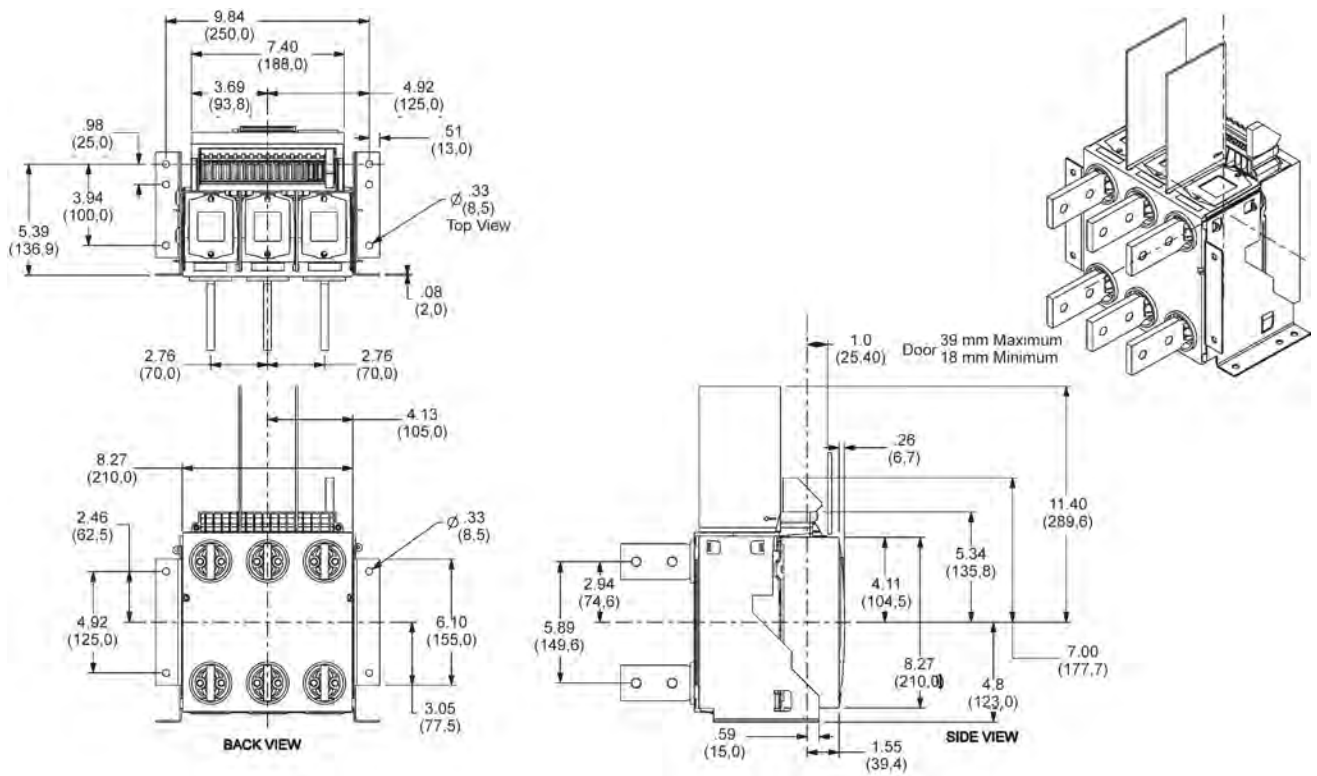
800-1200 A MasterPact NT Drawout—Pan Dimensions
